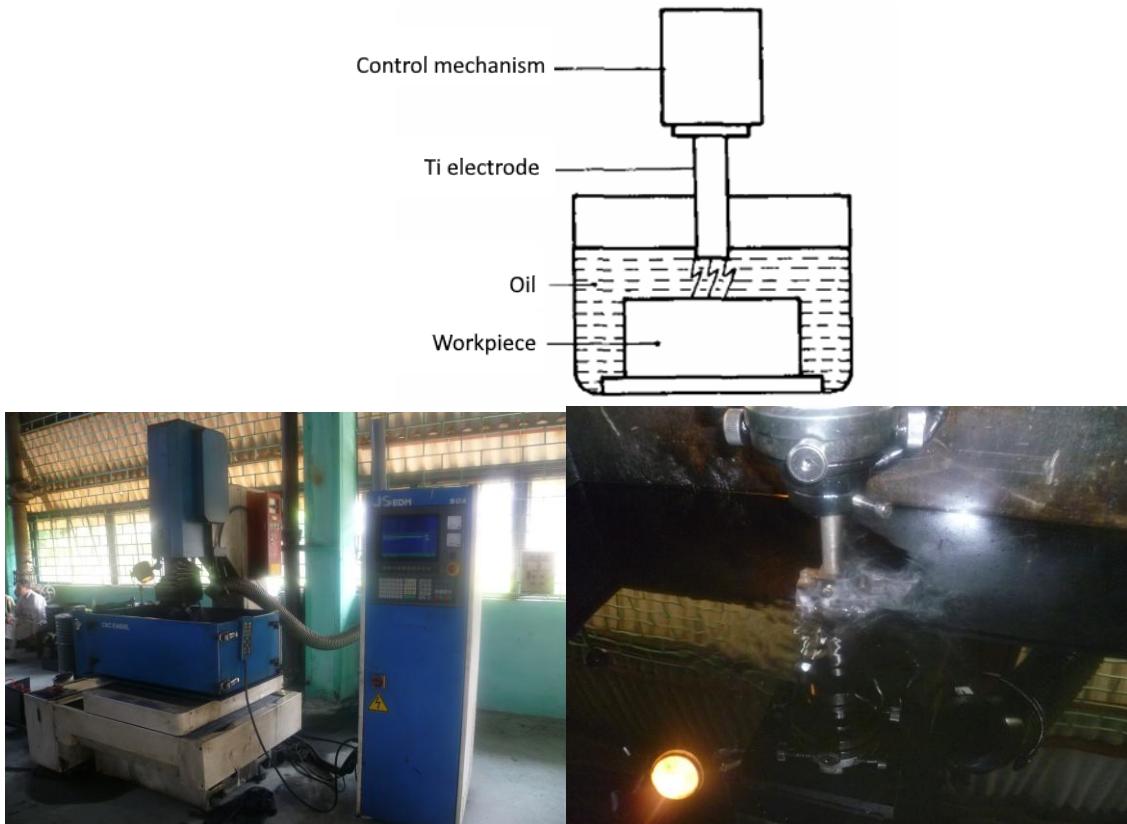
Schematic diagram of the EDM setup for machining SKD11 steel using a titanium electrode.
